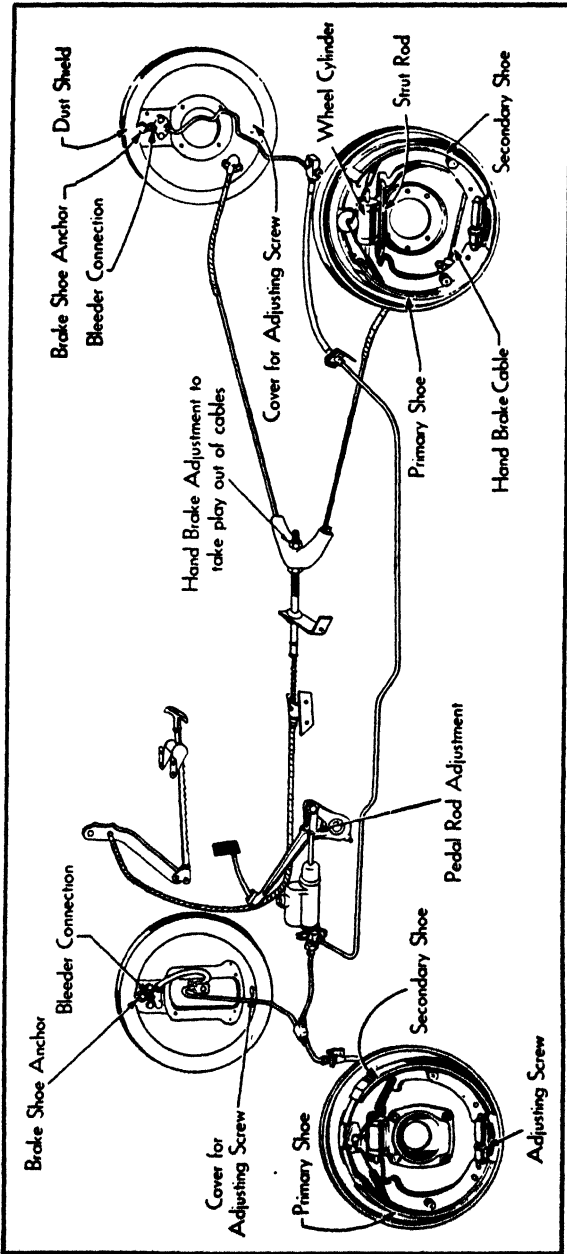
HYDRAULIC-BRAKE INSTALLATION ON PASSENGER CAR (CADILLAC).
